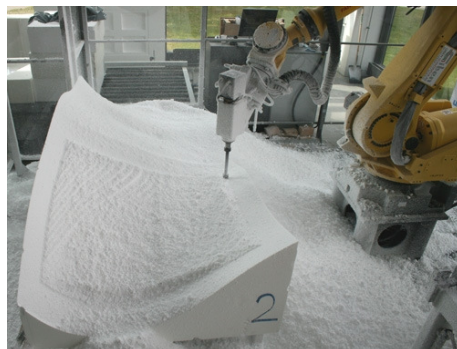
Photo of a robot CNC-machine milling in a styropor material.
